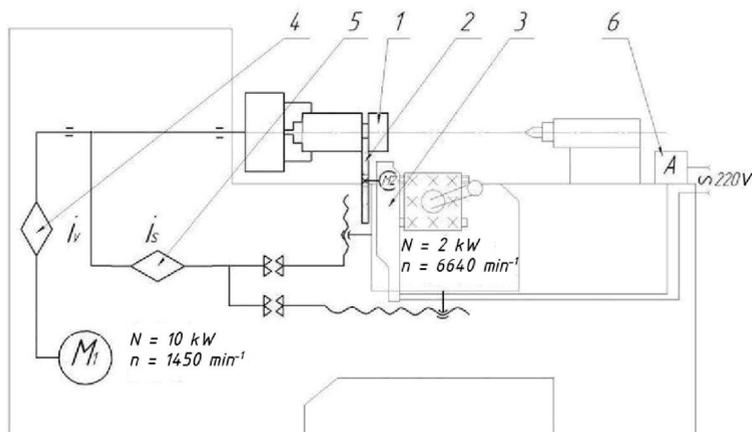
The scheme of rotational-abrasive grinding for cutting parts and grooving
